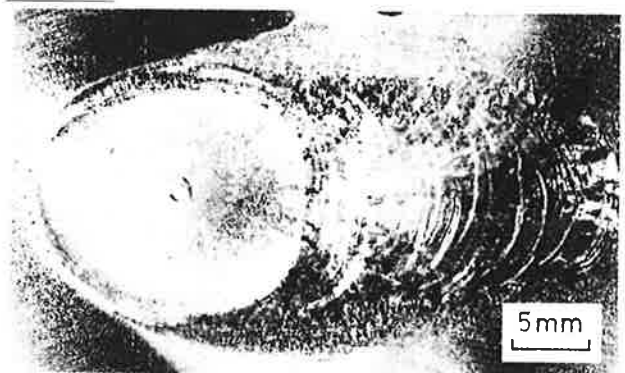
Appearance of surface of weld metal after cracking test
